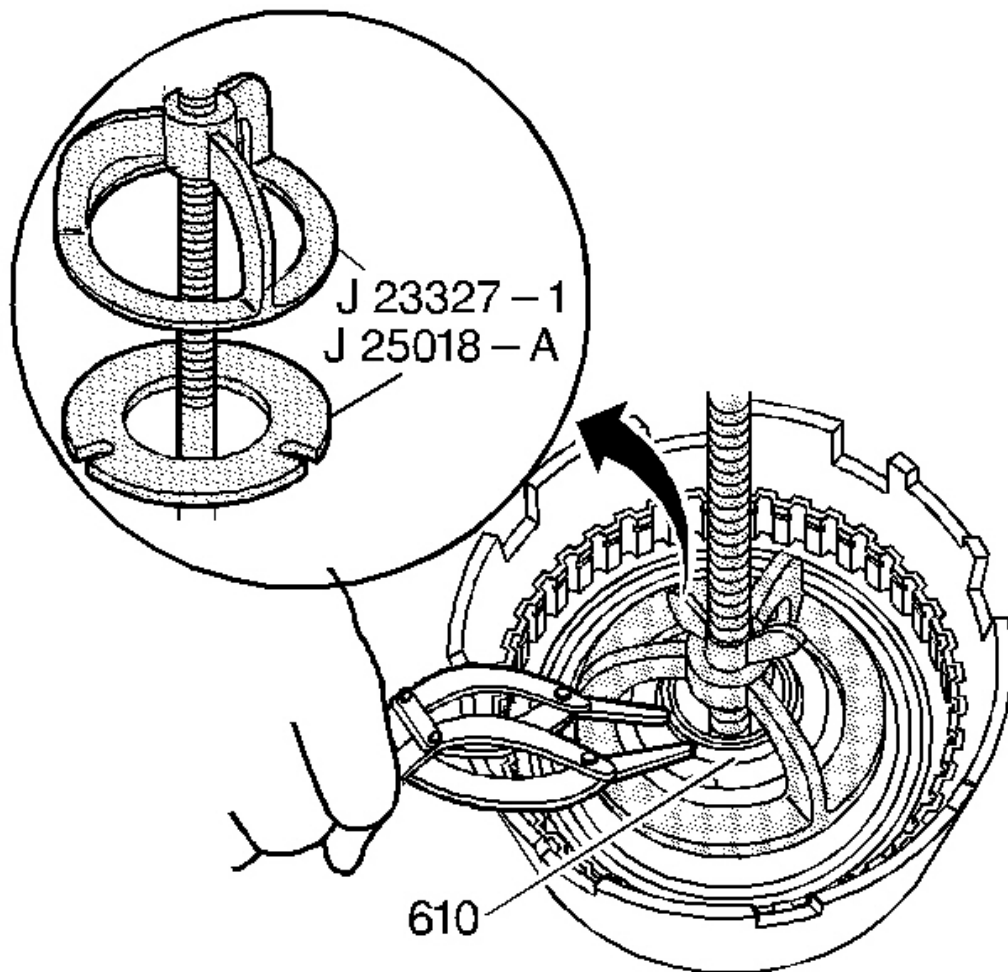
View Of Reverse Input Clutch Spring Retainer Ring
